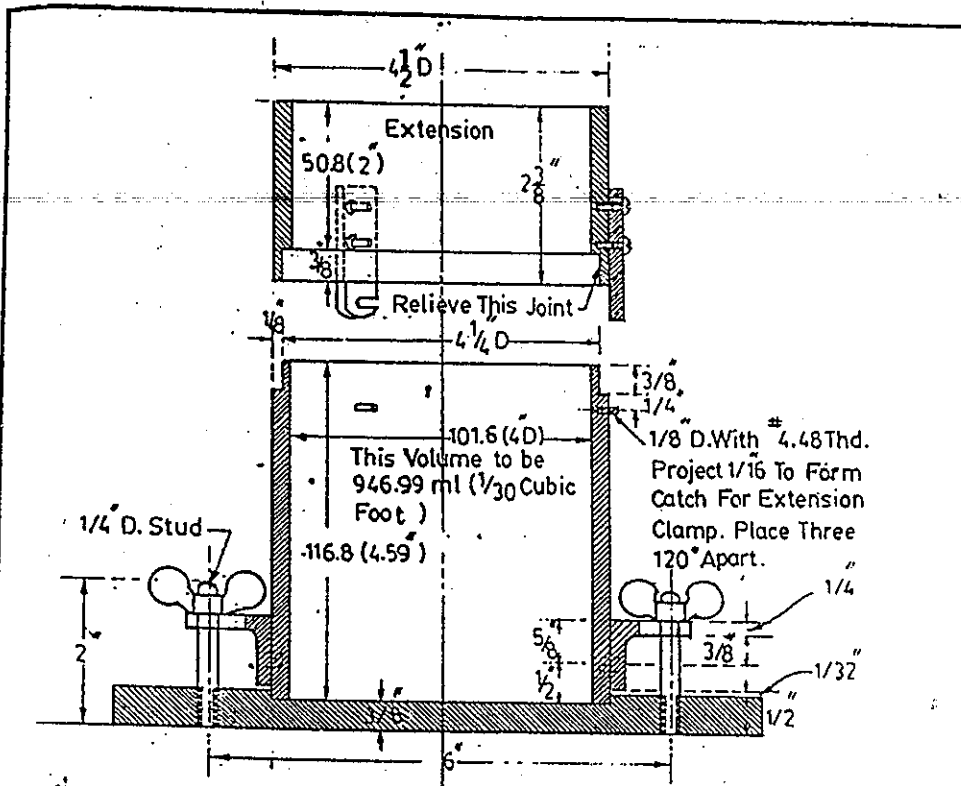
Cylindrical Mold, 101.6 mm (4.0 in) For Soil Tests.
